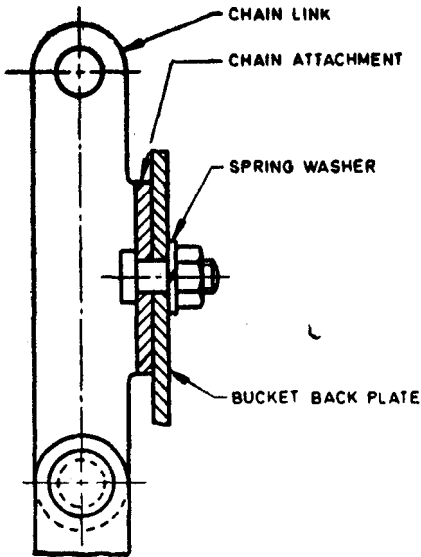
FIXING OF BUCKET TO CHAIN PASSING THROUGH BACK OF BUCKET
